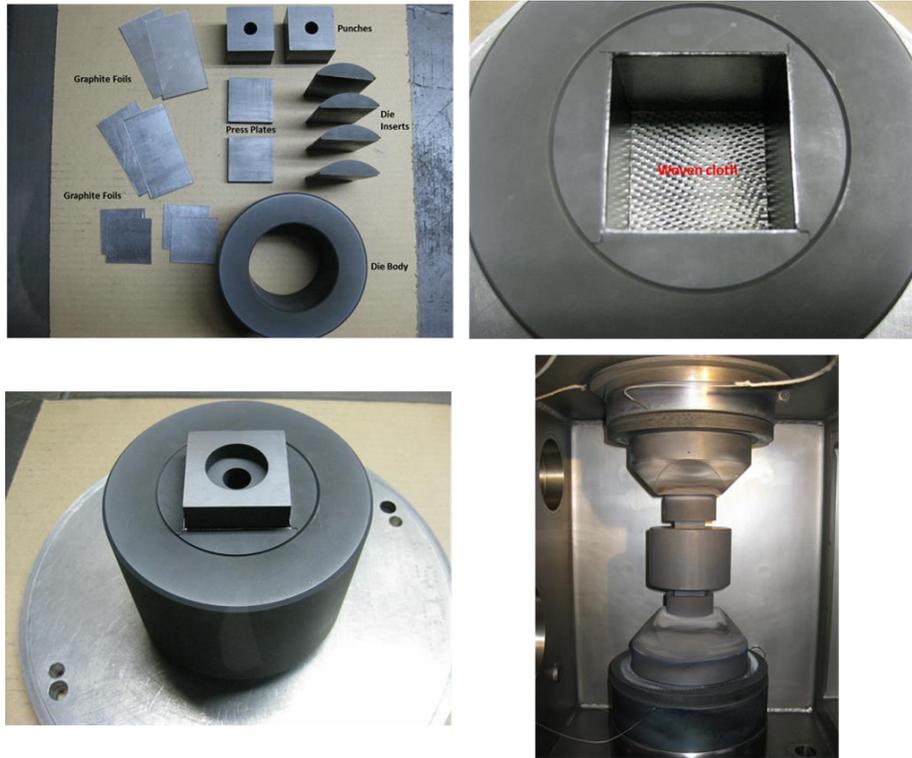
Assembly of graphite die used for making CMC panels (a) various pieces of graphite mold, (b) Syramic woven fabric placed with the graphite die mold, (c) assembly of graphite mold with top and bottom press plates, die body and (d) die assembly placed within the vacuum chamber of FAST system.
